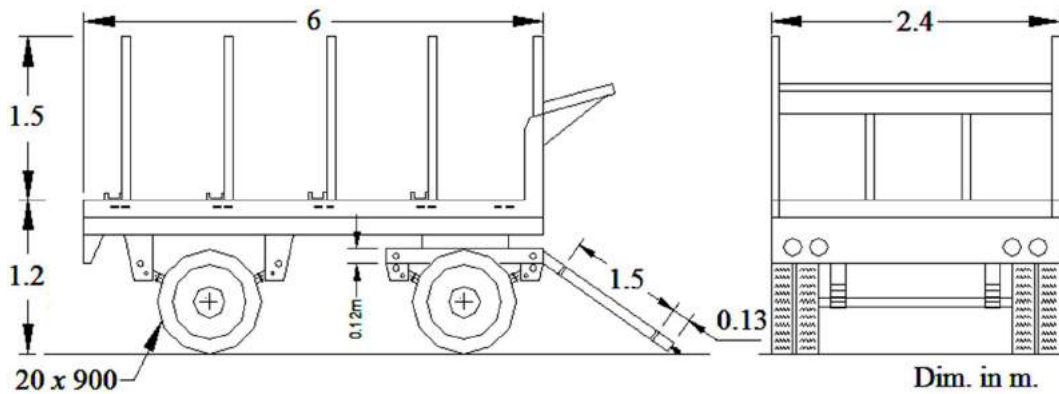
Schematic drawing of trailer equipped for cane transport.
